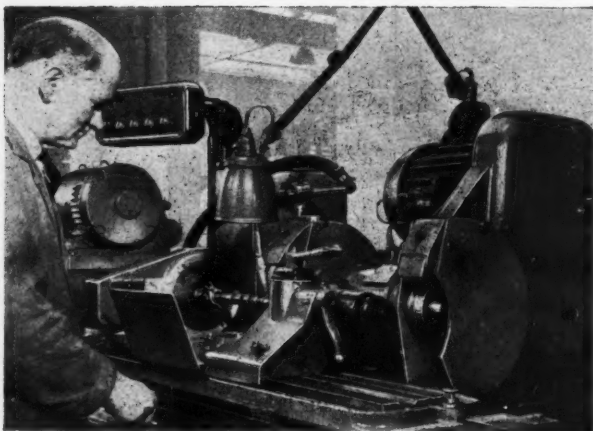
This Jones-Shipman type 1300 EITU cylindrical machine is installed in the production grinding section of the Turner Bridge works. It has electronic control of the wheel-head spindle speed, which is steplessly variable from 0 to 200 r.p.m. The machine is fitted with a double-swivel backslide, and a wheel-head with twin wheels for external grinding, also a built-in internal grinding spindle. At the set-up shown, a precision roller is being finish ground. A second machine of the same type is to be installed in the grinding section in the near future
